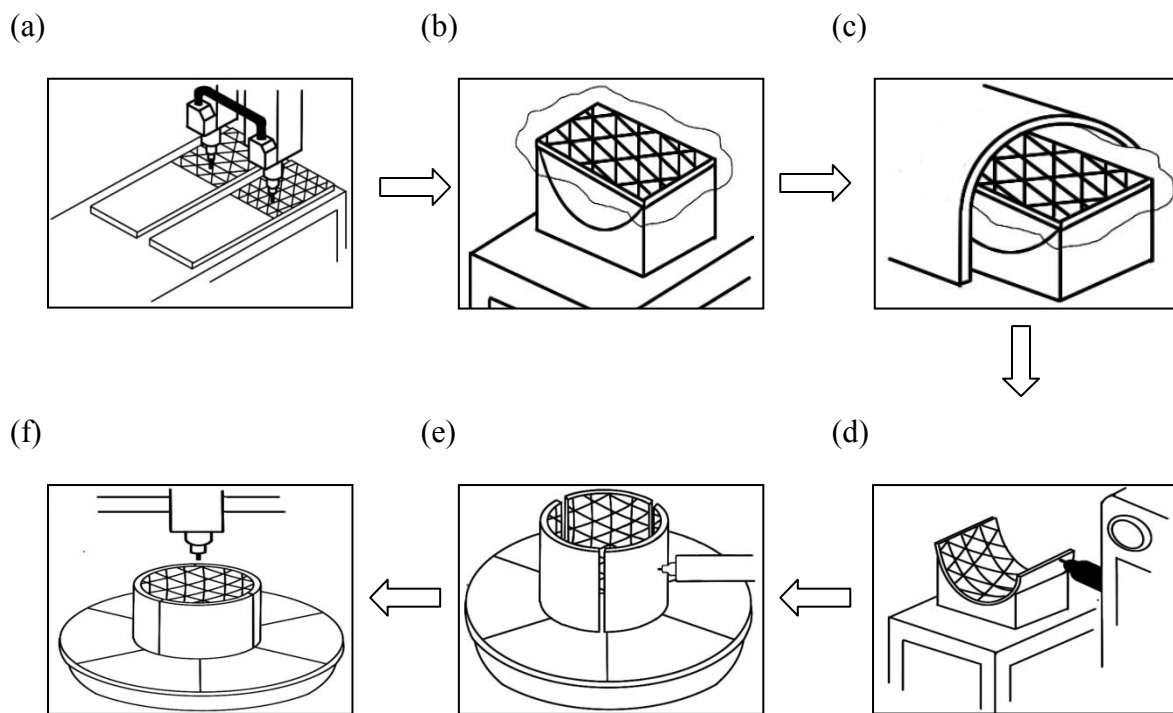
A schematic illustration of the CAF process for forming 1/3 pieces isogrid cylindrical assembly by autoclave forming.
